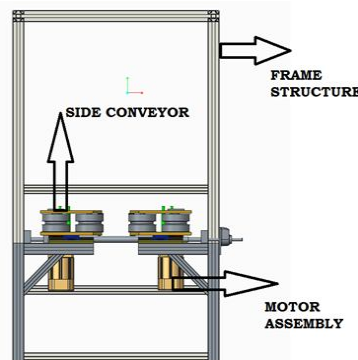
FRONT VIEW OF SIDE CONVEYOR ASSEMBLY
